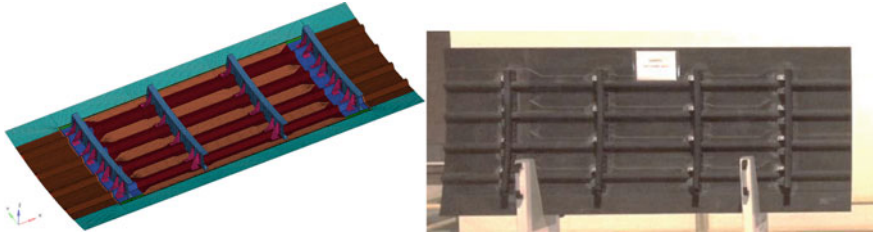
Left* Lower panel CATIA model [2]. *Right* Manufactured lower panel [10]
